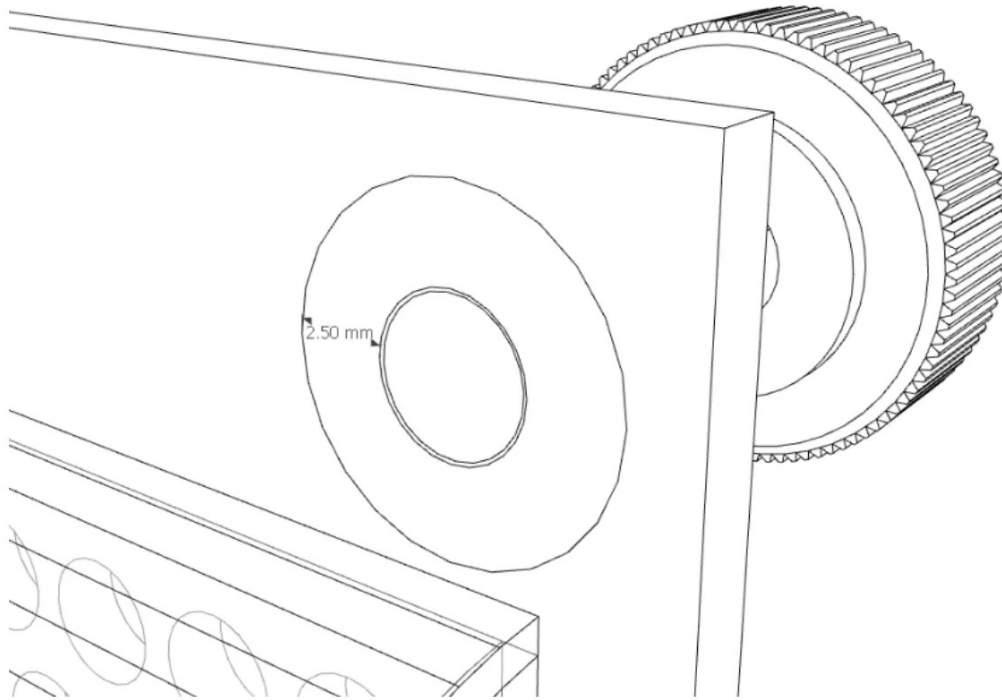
Screw hole clearance from inside mating surface of I/O shield
